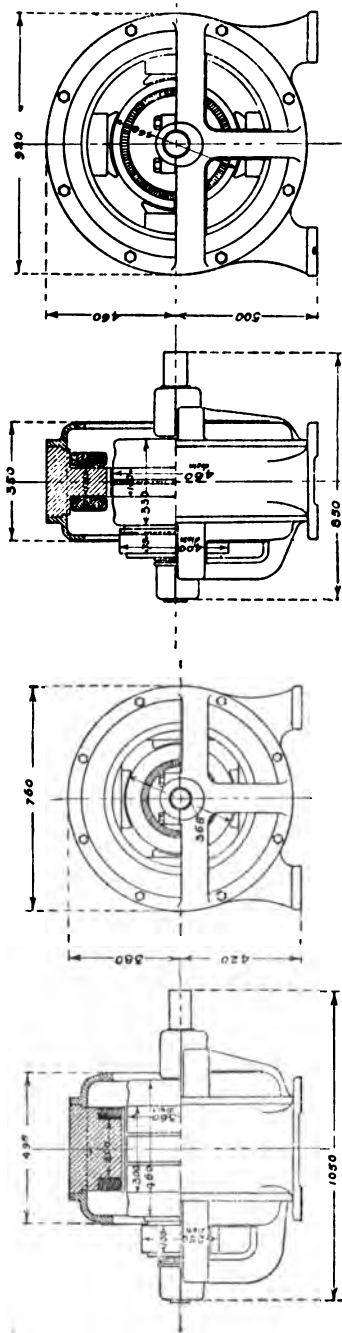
Two Alternative Designs for a 35-h.p. 600-r.p.m. 220-Volt Continuous-Electricity Motor. All dimensions in mm.
